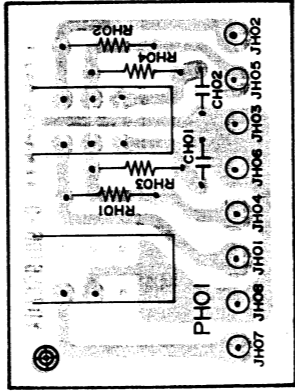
Muting Hi Filter Assembly (PH01) Component Locations
